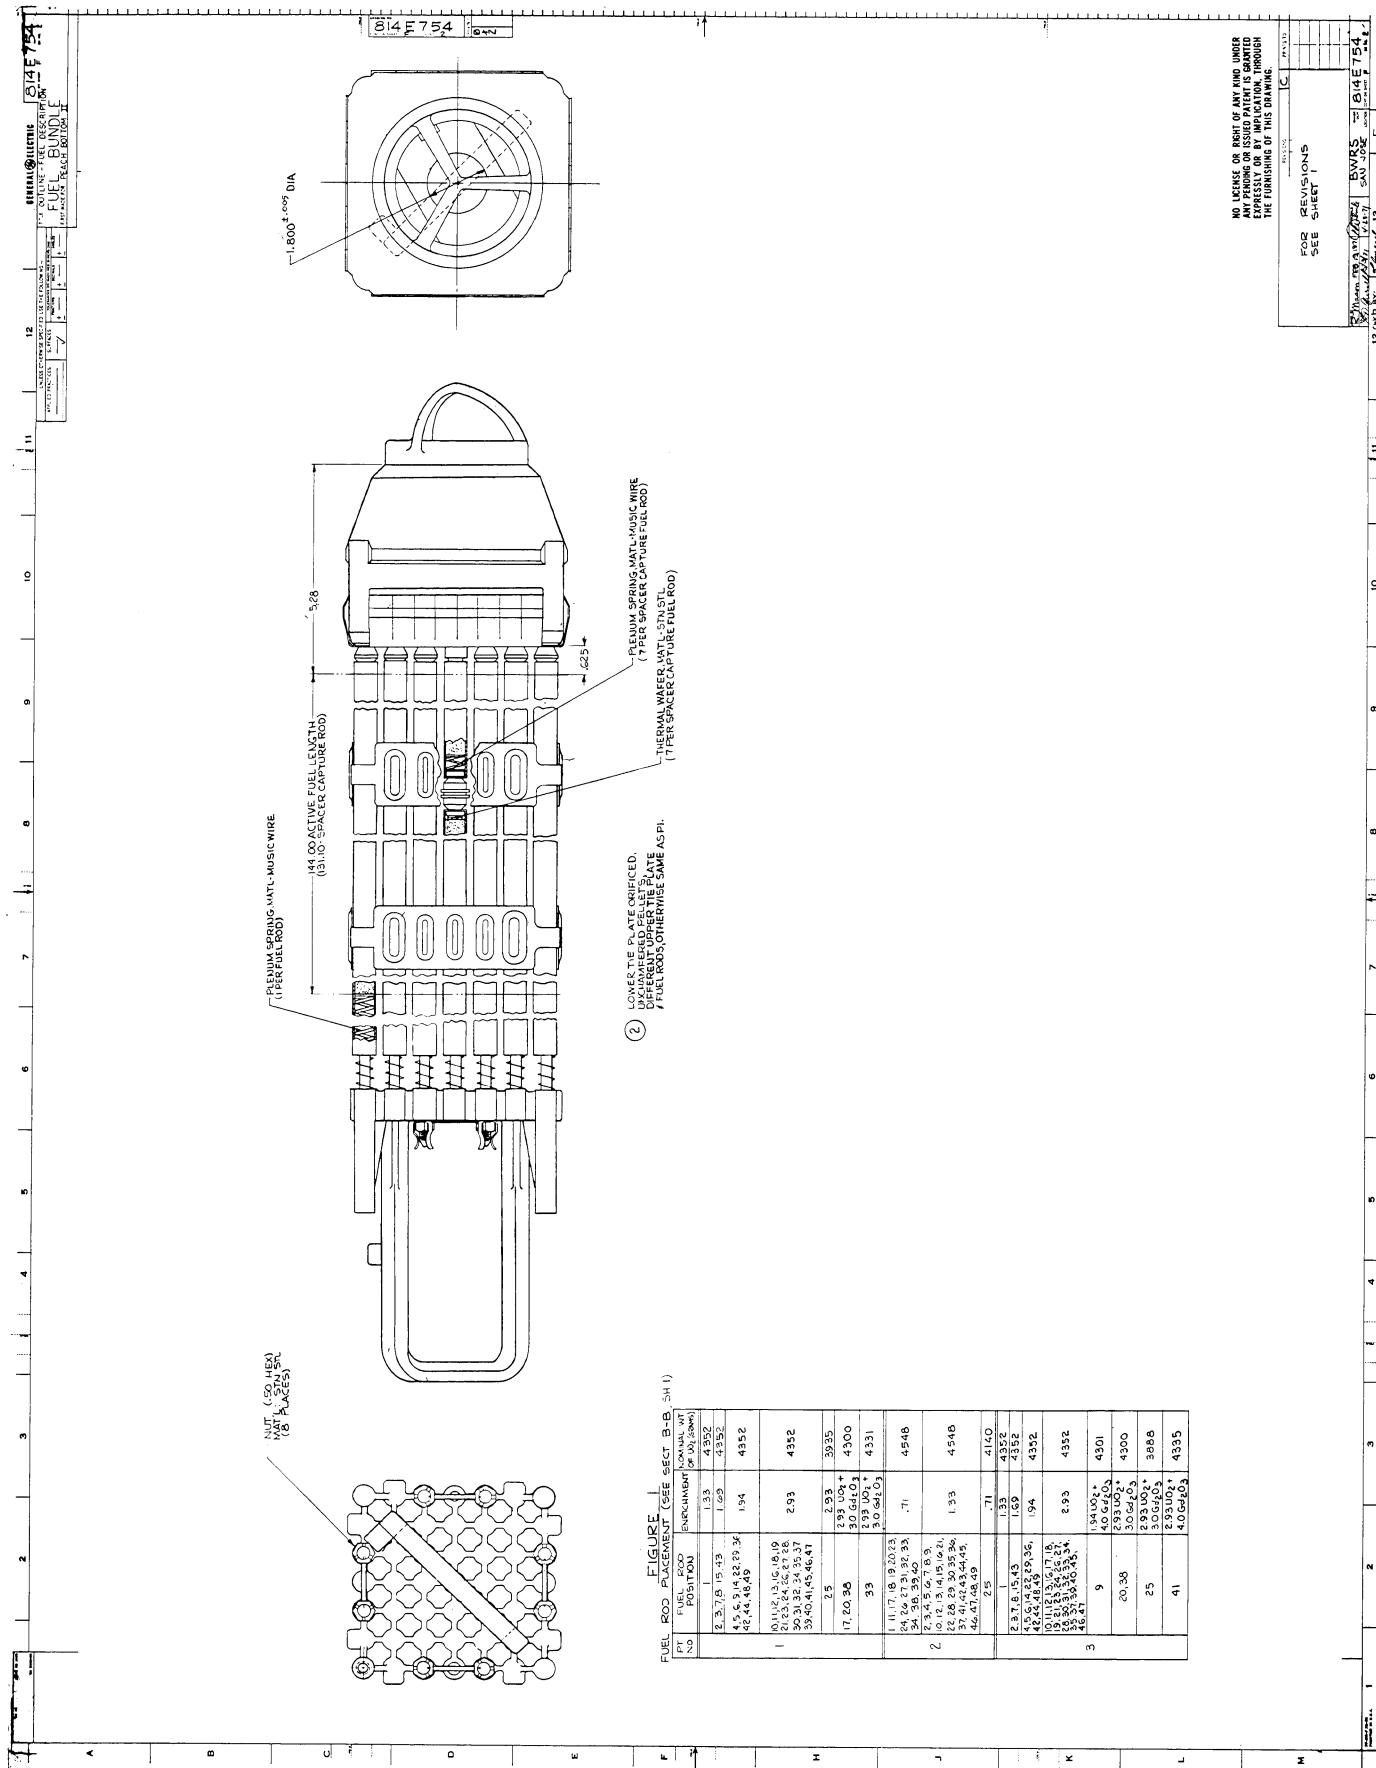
Fuel Assembly Drawing for Initial Core Fuel (Continued)
